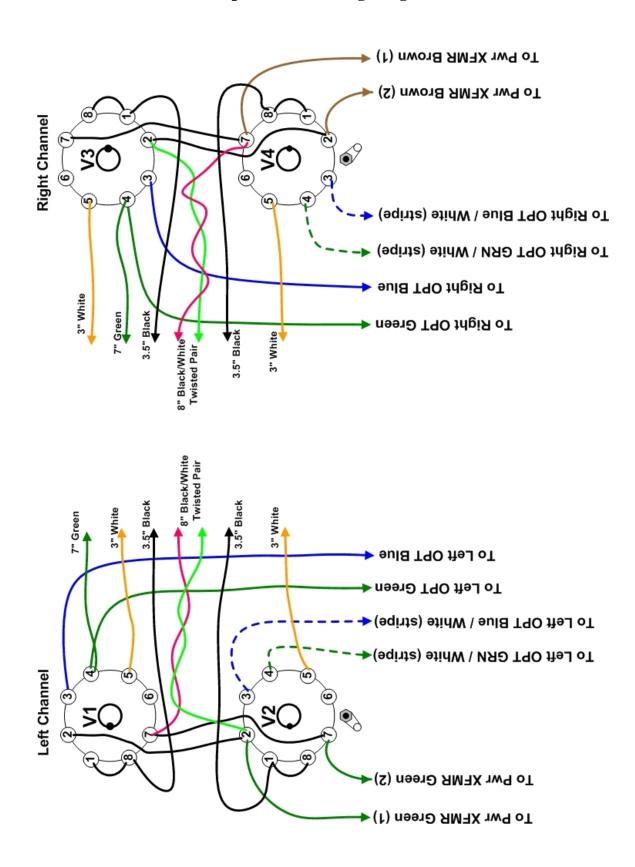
Stereo-70 System on Board -Upgrade PC Board Installation & Wiring Diagram Note: Wire Colors Shown for Clarity Only
